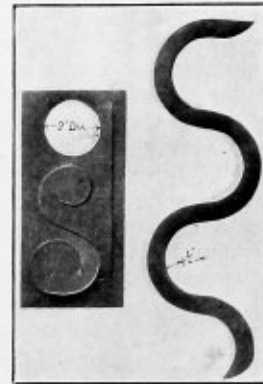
SAMPLE OF CUT BY "QUICKWORK" ROTARY SHEARS
